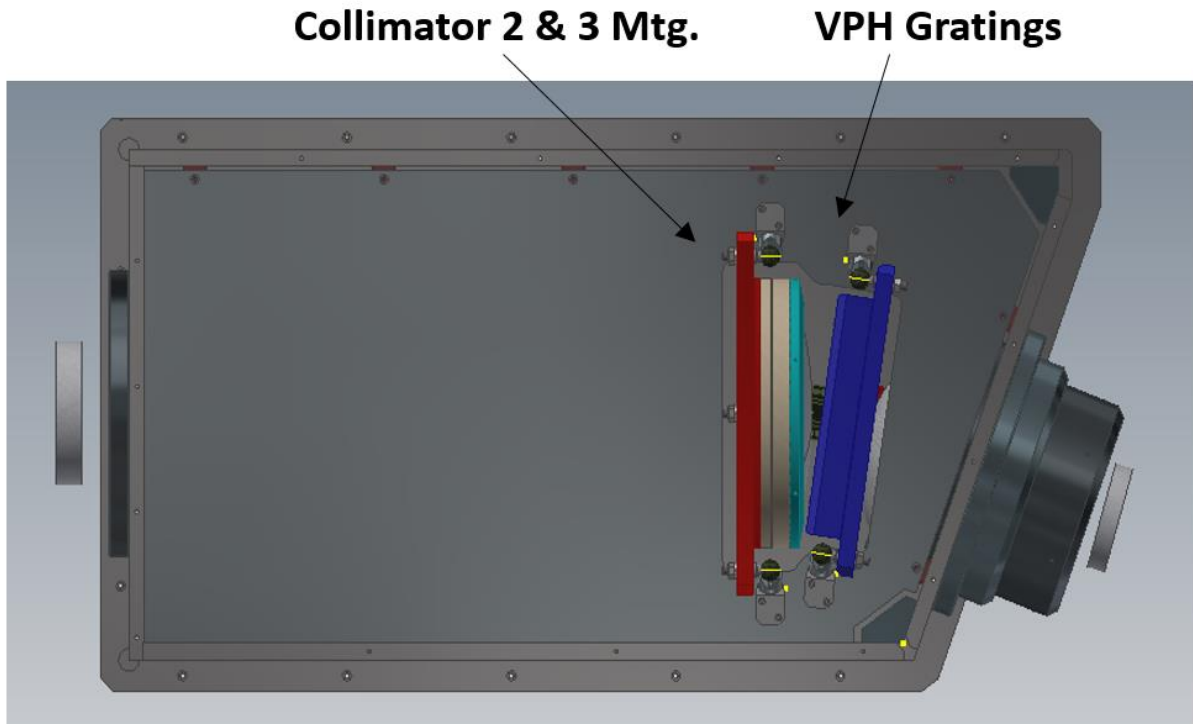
Cross-section from above showing the spectrograph assembly with top mounted elements.
